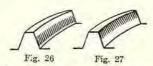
Shows heavy contact on the flank of the gear tooth. Gears set up in this way are noisy. To correct, pull the pinion out until contact comes to the full working depth of the gear tooth without leaving the lowest point of contact. See Fig. 23.
